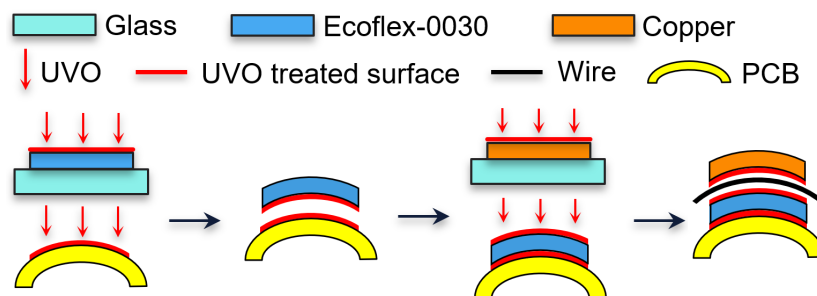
Illustration of the fabrication and integration steps for the sensor to the flexible PCB.
